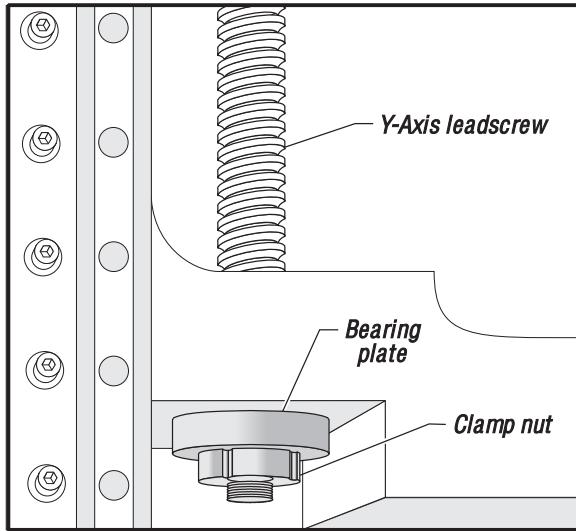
Y-axis lead screw bearing support end clamp nut.
